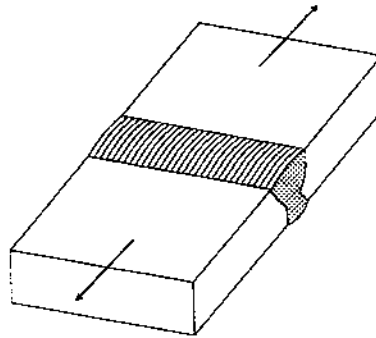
UKDEn Transverse Butt Weld 1
